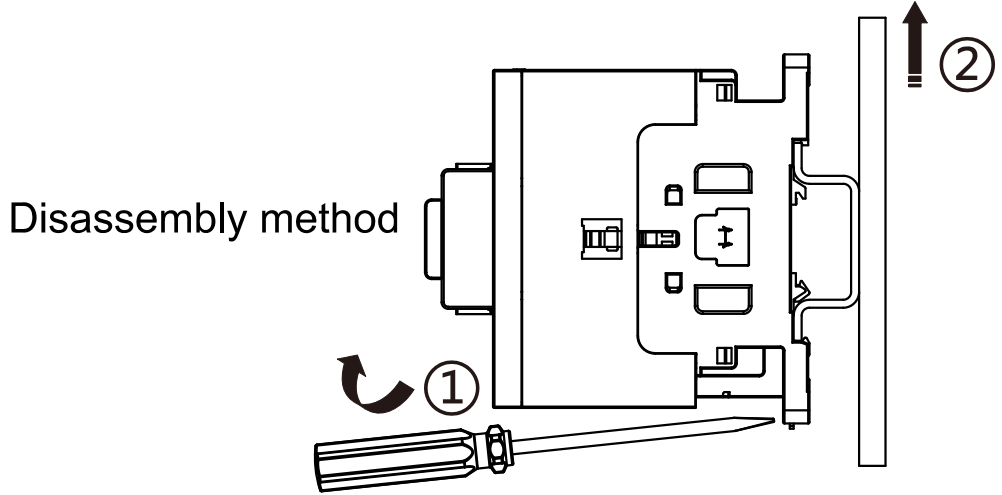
HDCX-80~95 Installation with 35mm DIN rail and disassembly methods
